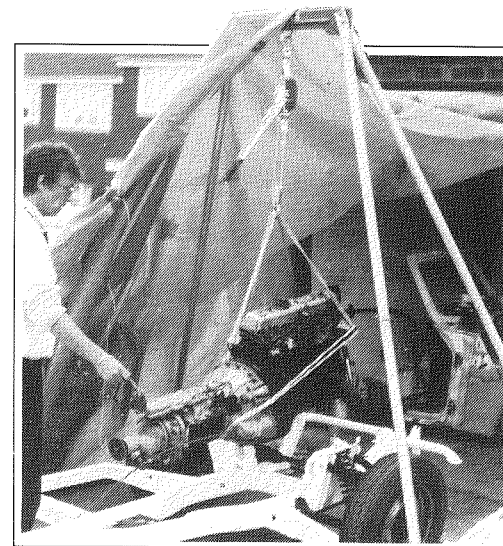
and roll the chassis underneath. Keep sensibly clear at all times. Do get someone around to help should anything go wrong and don't cut corners. Fit new engine and gearbox mountings.
